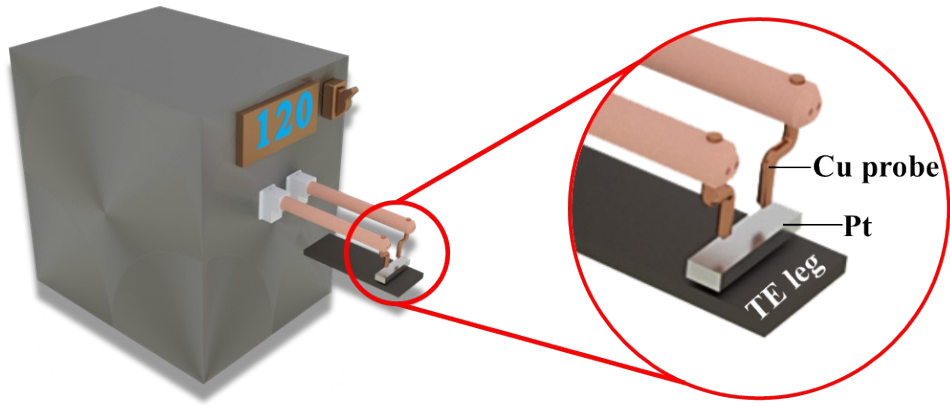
Schematics of the spot-welding method used in this work.
